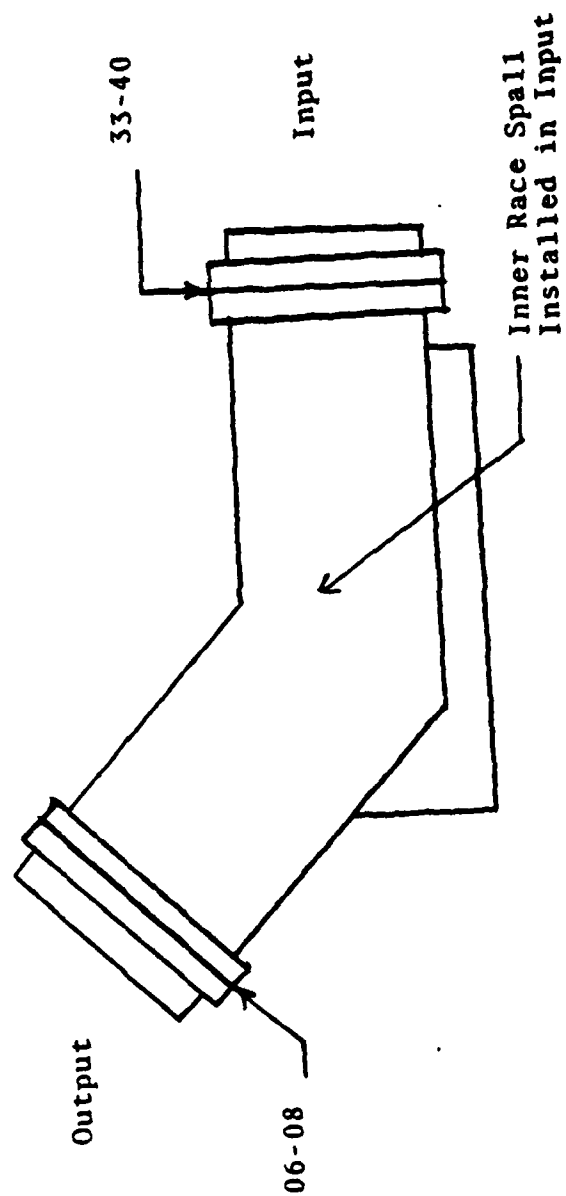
42^c GEARBOX IMPLANT MAIC 003 SPADE READINGS (TEST CELL)
